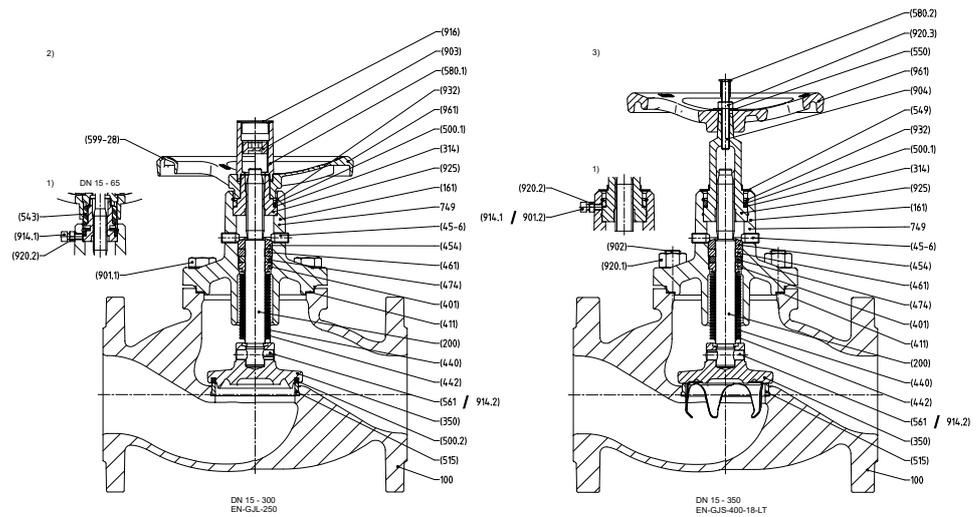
Sectional drawings; 1) shown rotated by 90°; 2) variant with PTFE ring on valve disc; 3) variant with V-port plug
